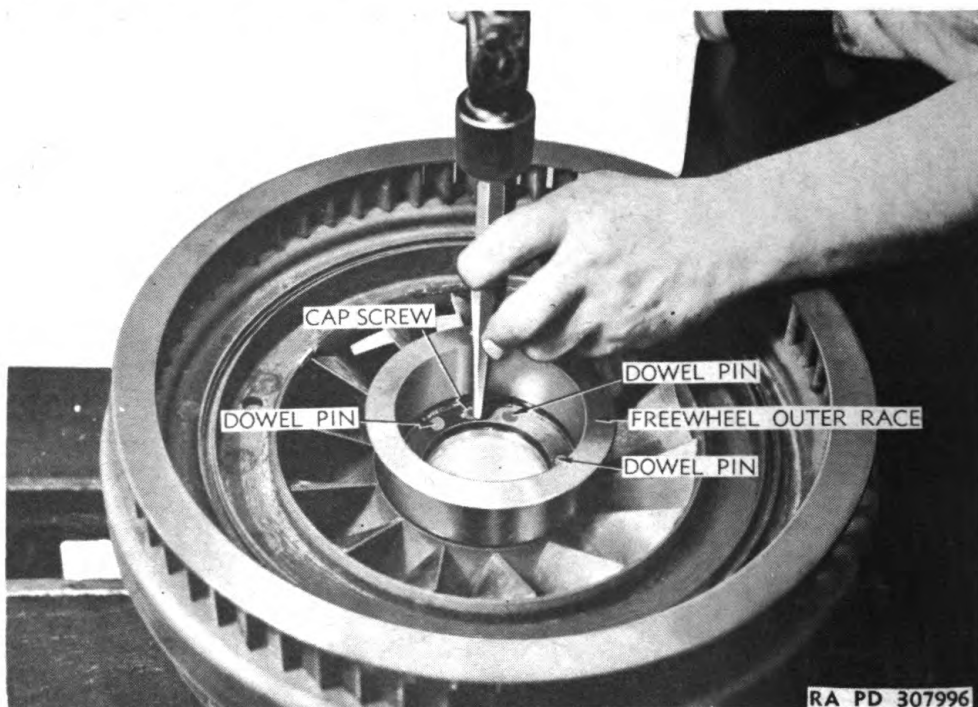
Locking Free-wheel Outer Race Retaining Screws
